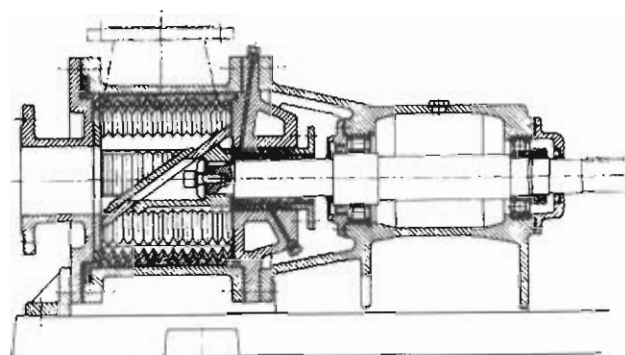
Oblique disc pump (Gorator pump) for simultaneous disintegration and pumping
